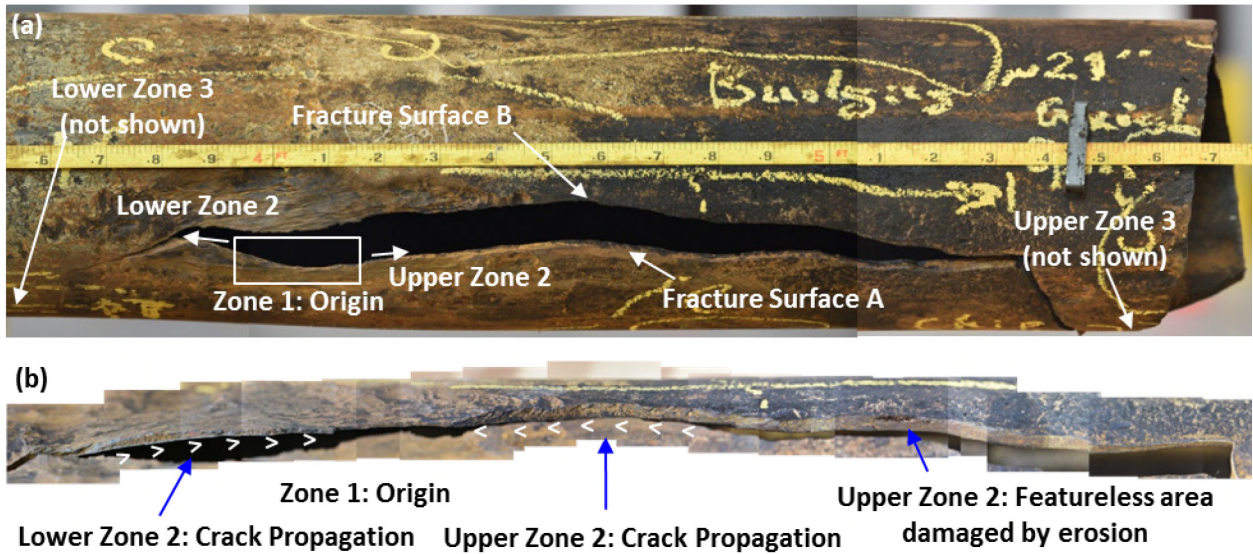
(a) Front and (b) Top Views of Fracture Surface B Identifying Zones 1 and 2
